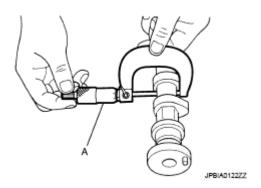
Checking Camshaft Cam Height Courtesy of NISSAN MOTOR CO., U.S.A.
